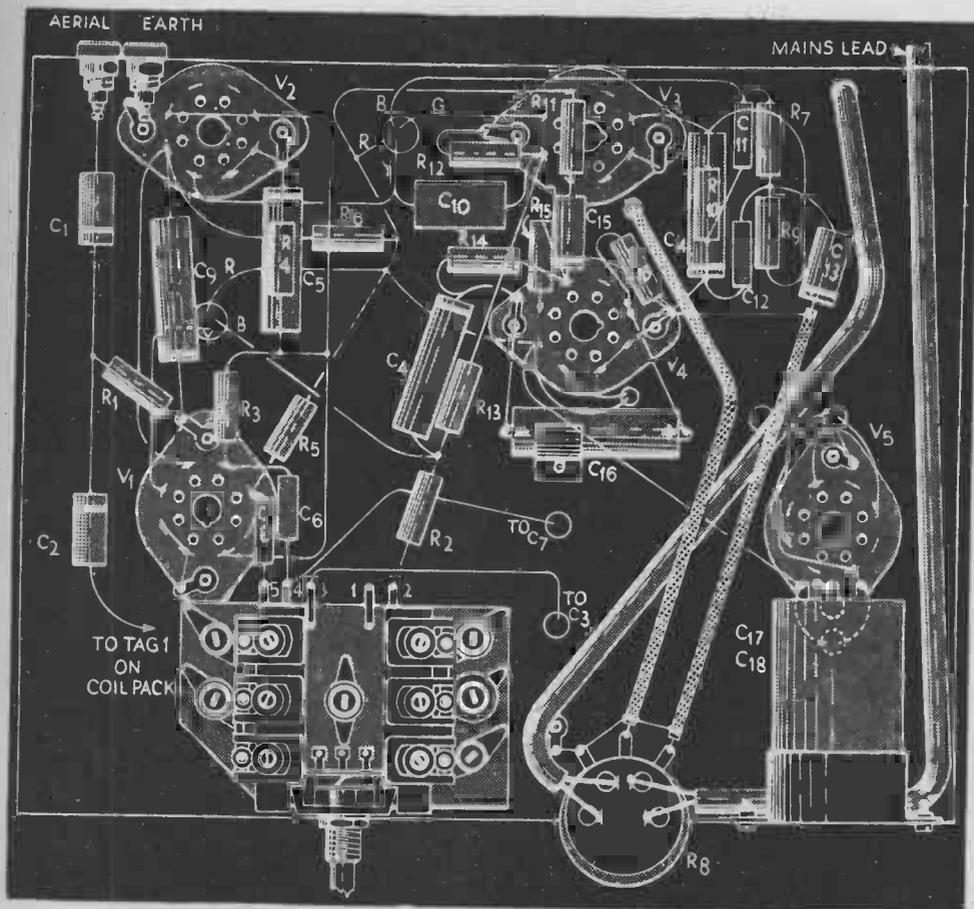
THE A.C. MAINS SUPERHET, UNDER-CHASSIS VIEW, HEATER WIRING NOT SHOWN
